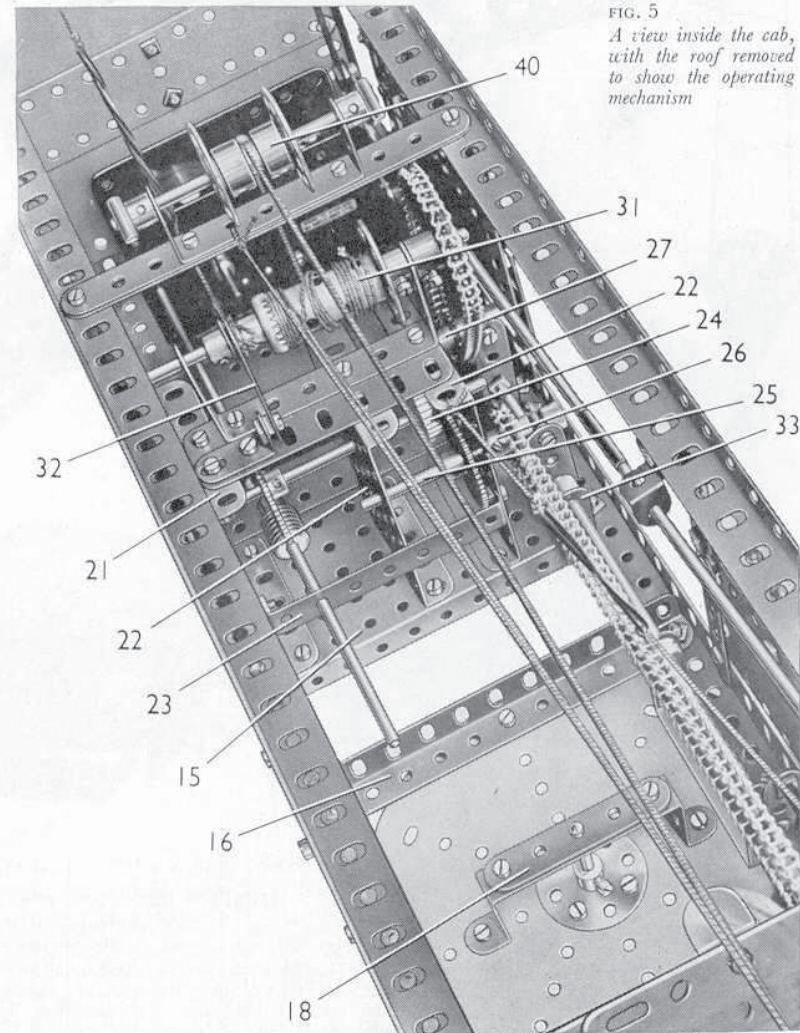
A view inside the cab, with the roof removed to show the operating mechanism
